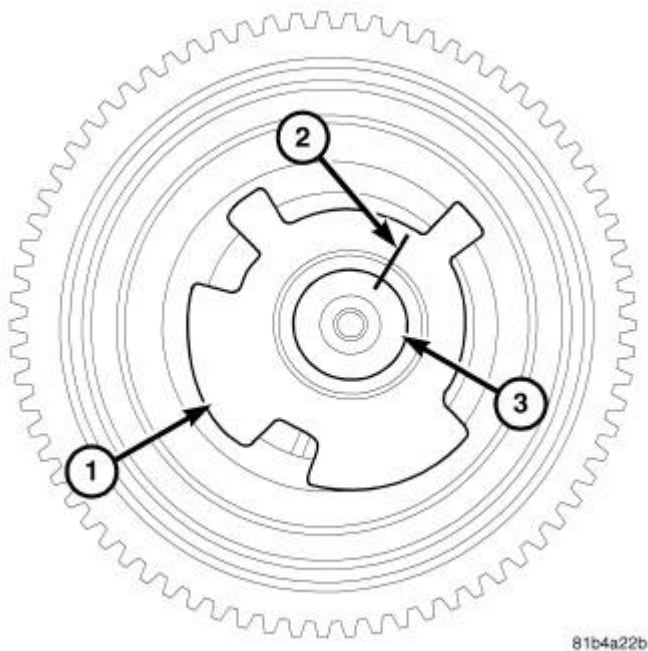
Mark Across Reluctor Wheel & Exhaust Camshaft
